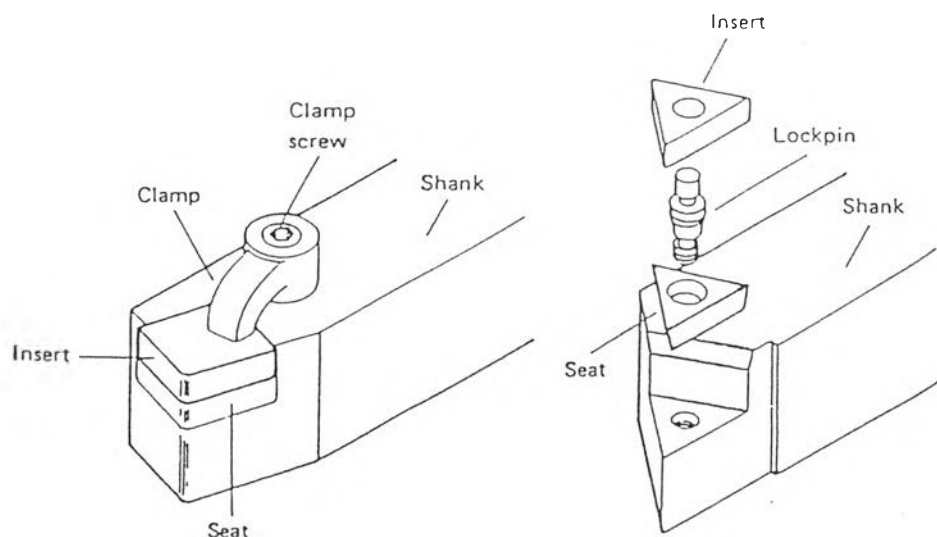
Typical styles of clamped on inserts tools (8)
